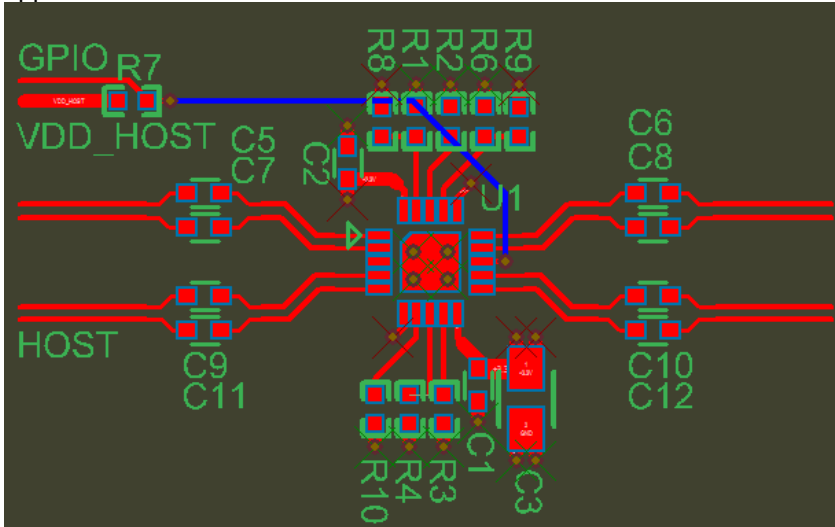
Typical Layout Routing of PI3EQX6741SLZDE
